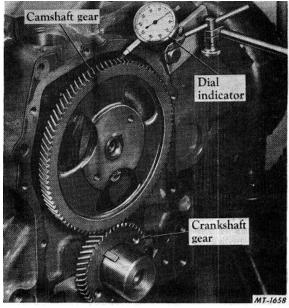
Checking Camshaft and Crankshaft Gear Back Lash
